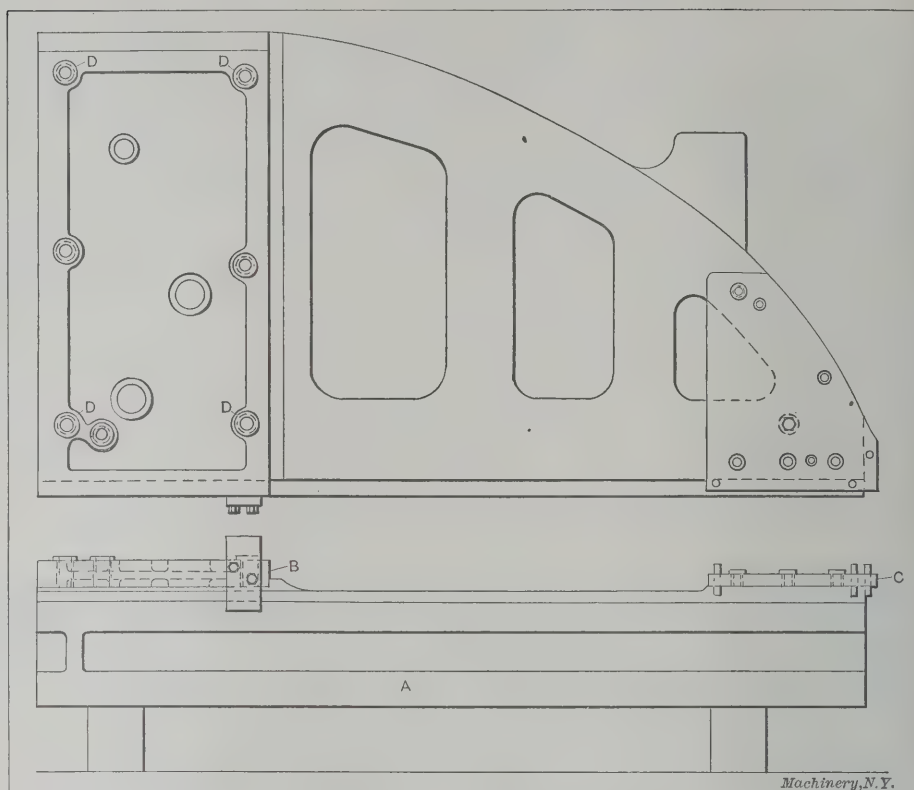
Front Housing with Jigs in Position for Drilling Clamping Bolt Holes. Same Jigs are used for Similar Operations on the Back Housing
